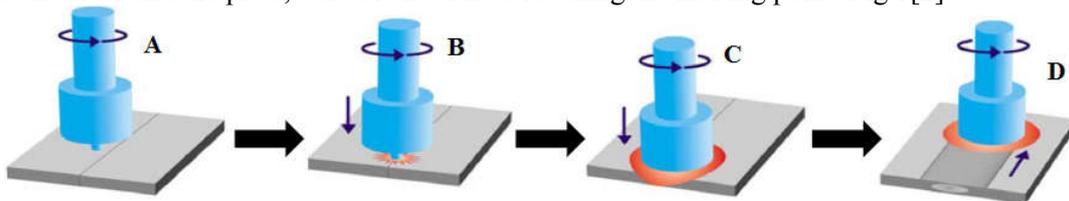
The four stages of the FSW process: (A) The tool is rotated, (B) penetrations, (C) shoulder is brought into contact with the surface of the parts to be assembled, and (D) Welding phase.
